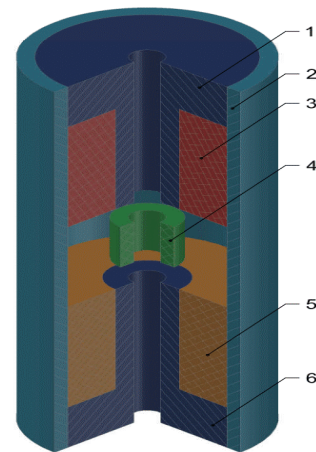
Principal construction of the studied actuator: 1 – upper core; 2 – outer core; 3 – upper coil; 4 – moving permanent magnet; 5 – lower coil; 6 – lower core.
